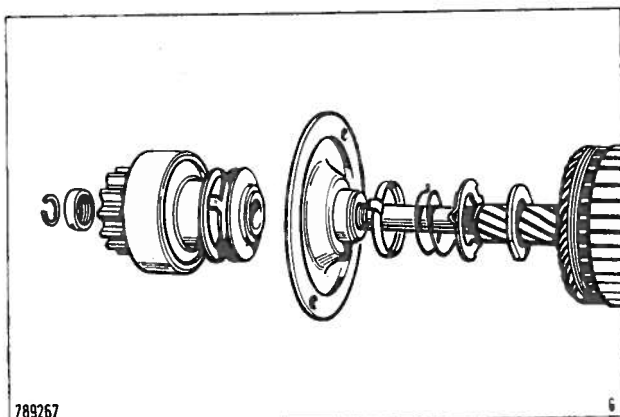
Fitment of brake fibre washer, spring assembly and intermediate plate
